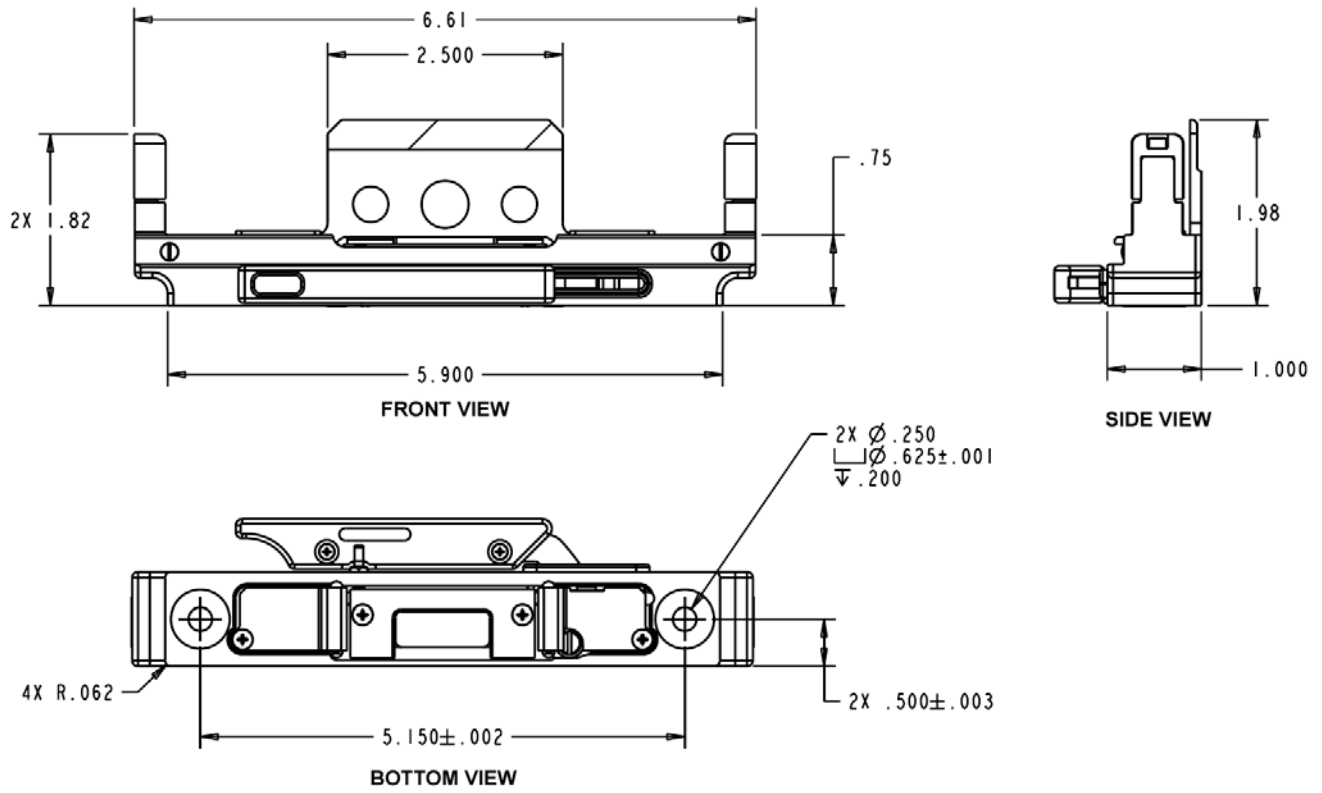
CrewMate Docking Cradle Dimensions (in Inches)
